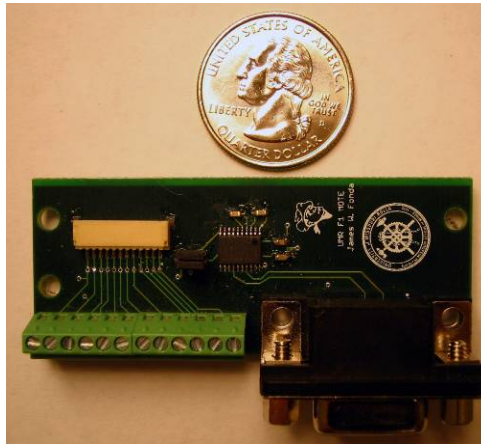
Screw Terminal Breakout Board featuring DB9 RS-232 (bottom-right), screw-terminals (bottom-left), ribbon cable connector (top-left), and RS-232 transceiver (middle).
